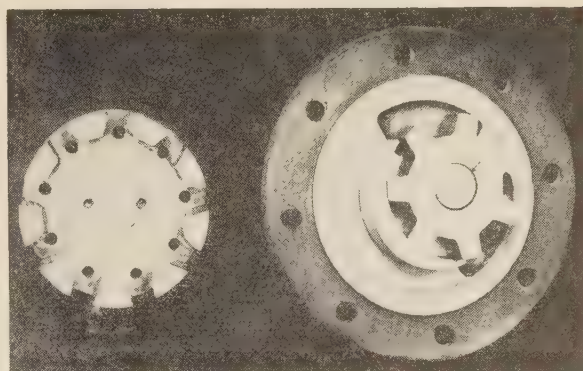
ROTARY TYPE OF OIL PUMP USED AS PART OF HEATER-PUMP SET
